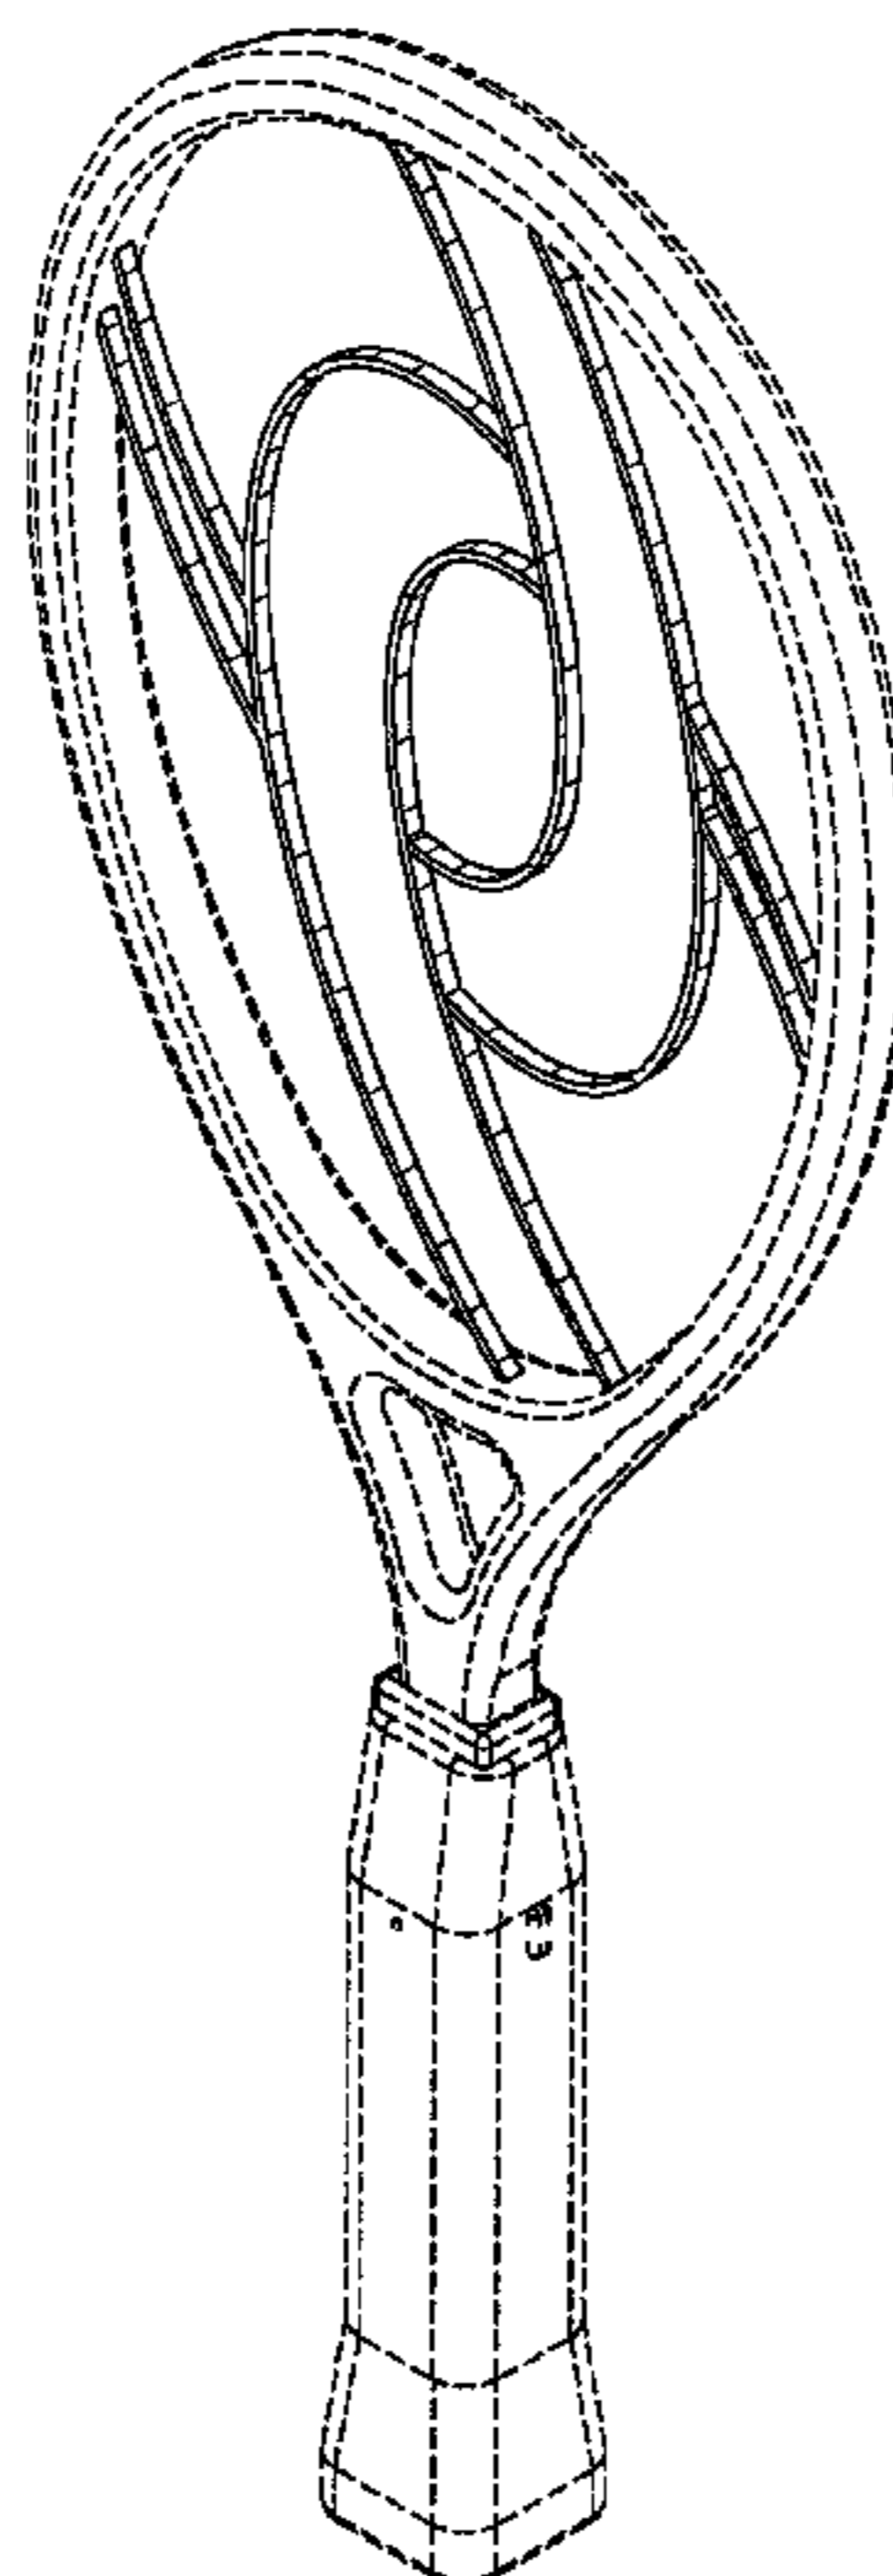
is a top, front and left side perspective view of the electronic pest control device of FIG. 1, with the broken line mesh removed for clearer view of the invention;
